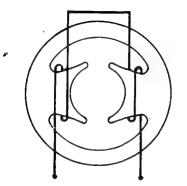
SINGLE PHASE STATOR WINDING
